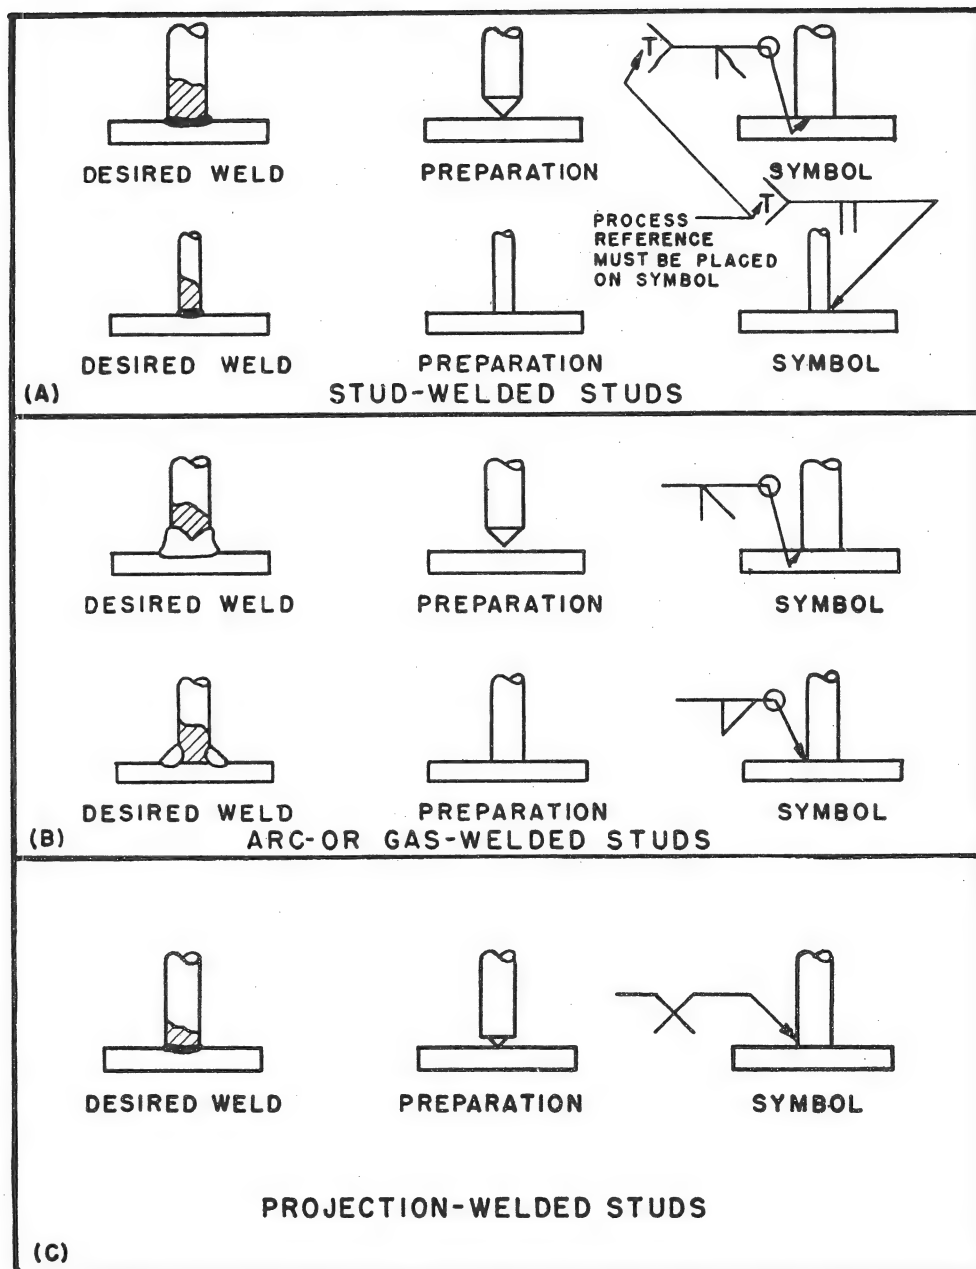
Use of Welding Symbols to Indicate the Welding of Studs
